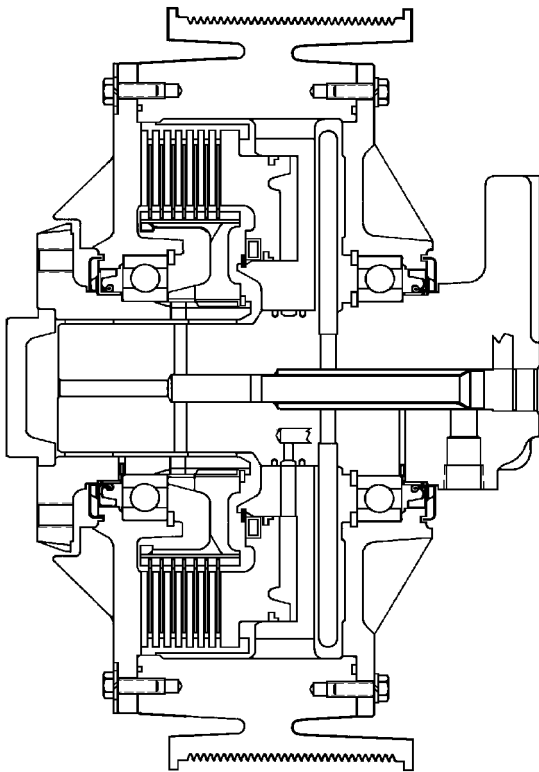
FAN CLUTCH ASSEMBLY
